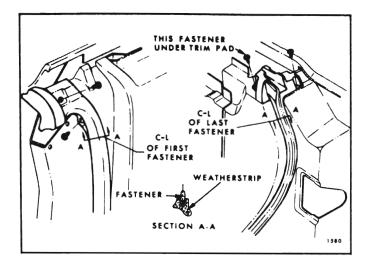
Door Weatherstrip - Attachment Under Trim Assemblies
